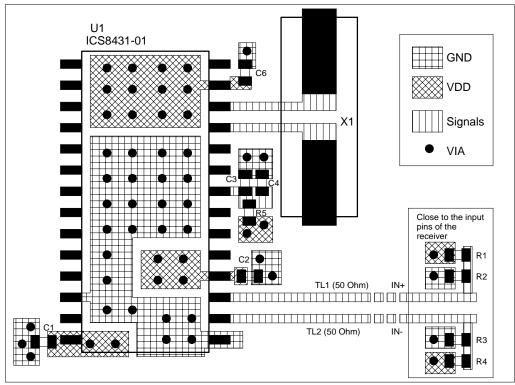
B. PCB BOARD LAYOUT FOR ICS8431-01
